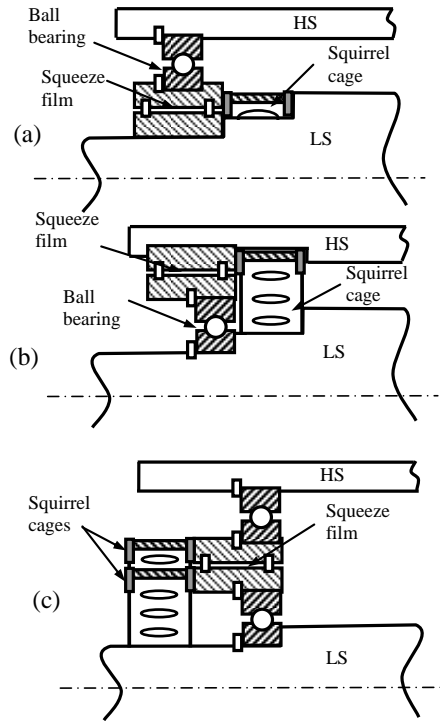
Schematic views of intershaft damper configurations: (a) squeeze film rotates with low speed (LS) rotor, (b) squeeze film rotates with high speed (HS) rotor, and (c) double ball bearing-squirrel cage design.
